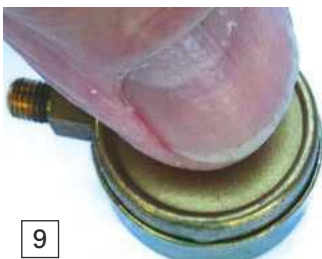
Finally push the housing down until it sits on the seal behind the glass. Check that the glass is not loose or free to rotate, so you know that the seal is securely holding the glass.
